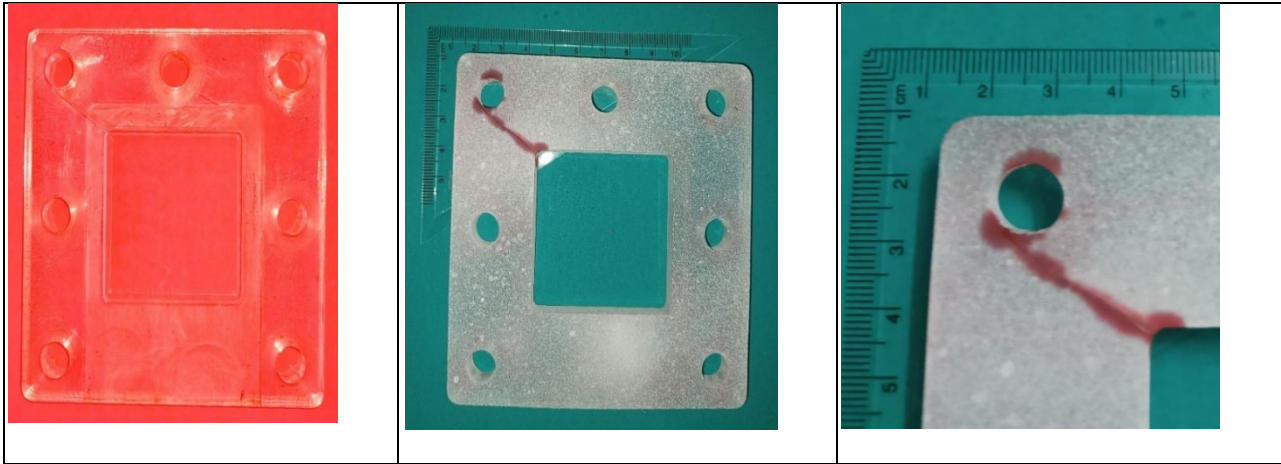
(a) VT cathode end acrylic cover, (b) Penetrant Test on cathode end acrylic cover, (c) Close shot of PT defect indication
